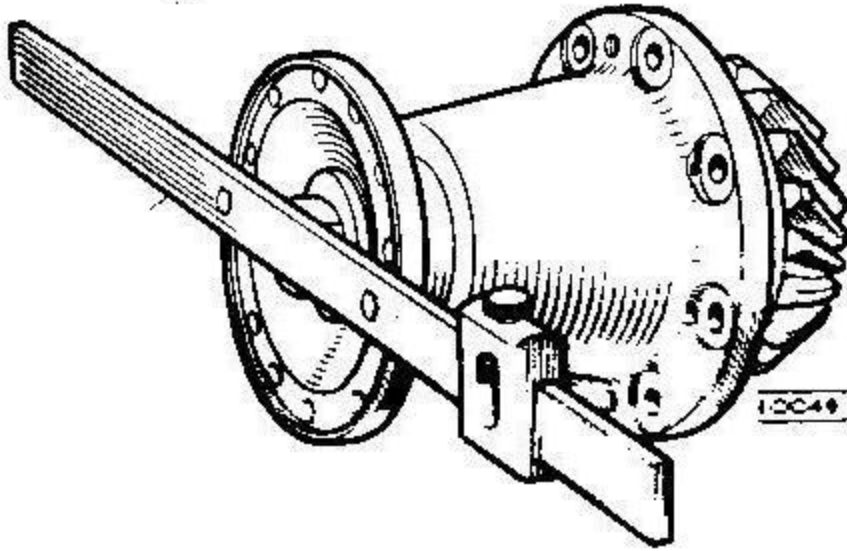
Checking the nose piece bearing preload by the steel-yard method
